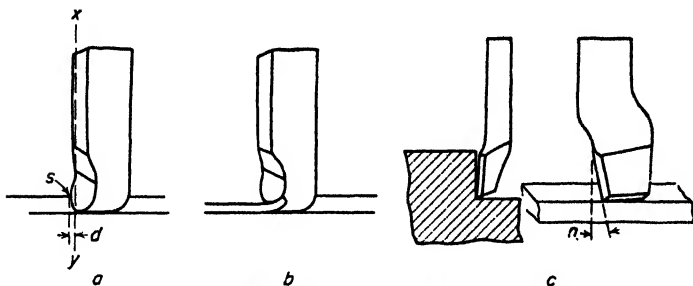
Cutting action of tool when machining a plane surface. Note in view (a) the line xy is parallel to the base of the tool and therefore the tool has no front rake. Note also that since the cutting edge is given side rake, the start of the cut is made at s and the distance d is traversed before the full depth of the cut is taken; thus the tool enters the work gradually and prevents the shock of having the full cutting edge strike the metal at once. The way in which the chip curves is shown in (b). In (c) is shown a side tool with the cutting edge ground flat to take a finishing cut, say, $\frac{1}{4}$ in. or more wide. Note the angle of shear n to give an easy start and finish of the cut. A side tool, ground in this way, is much used in shaper and planer work for finishing cast iron.
